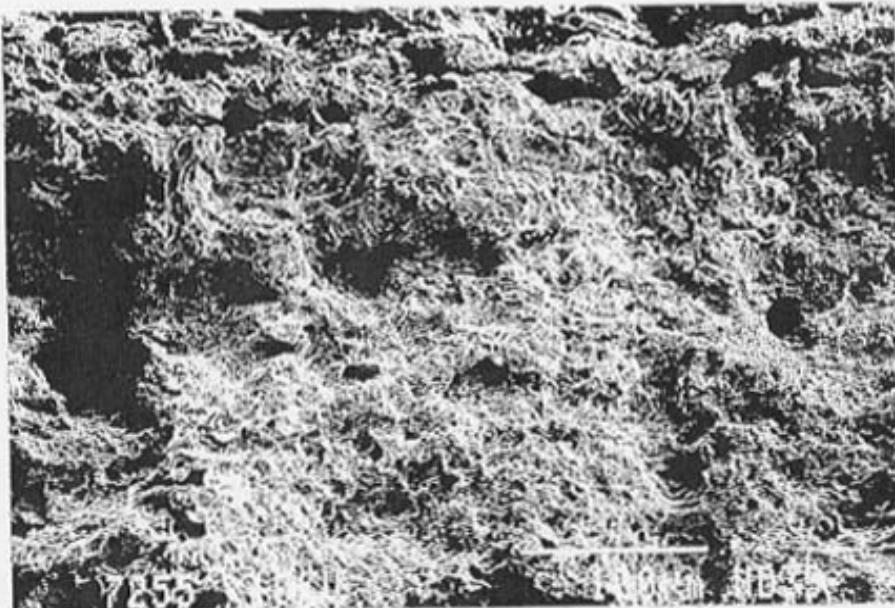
Inner portside hinge lug fatigue crack bench marks + striations
